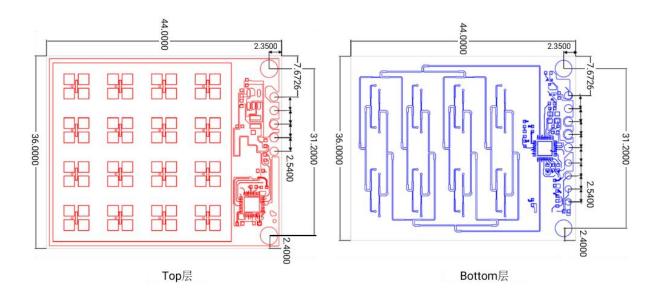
1 HLK-LD2413 Mechanical Dimensions
